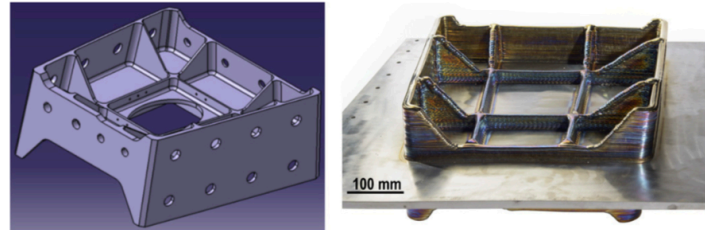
Outboard landing gear rib (24 kg) produced in Ti-6Al-4V by Wire + Arc Additive Manufacturing (WAAM): CAD model (left, courtesy of the Welding Engineering and Laser Processing Centre at Cranfield University) and printed part before machining (right, [352]).
